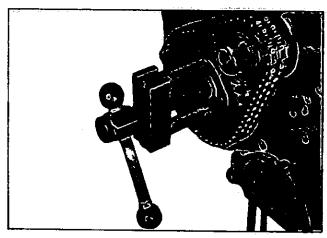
Removing Crank Gear, Cam Gear and Chain
